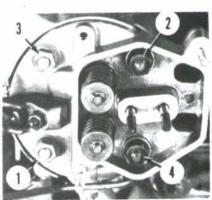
Tighten cylinder head stud nuts in steps following sequence shown.
